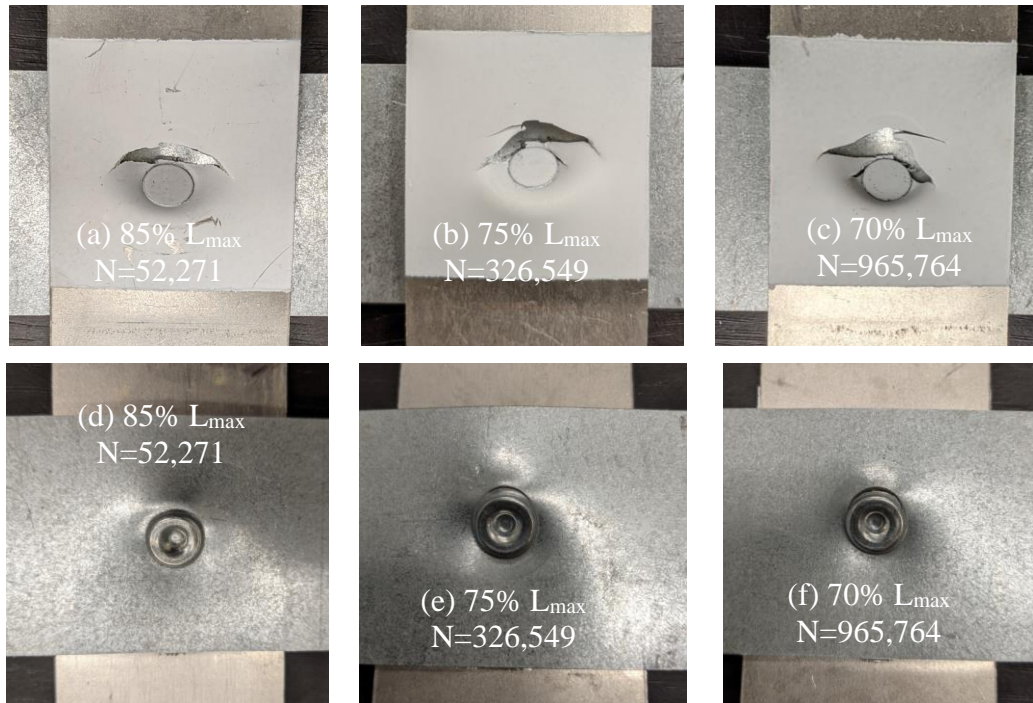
Al 6016 1mm by DX54D 0.95mm SPR cross-tension post fatigue test 90° pierced sheet details (a-c) and clenched sheet details (d-h) of varying load levels
